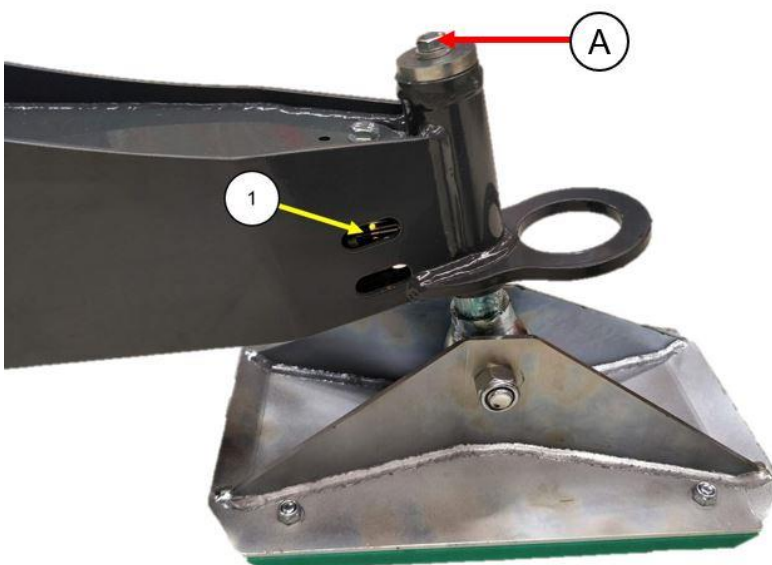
Outrigger position sensor pin locking screw (A) and outrigger limit switch (1)
